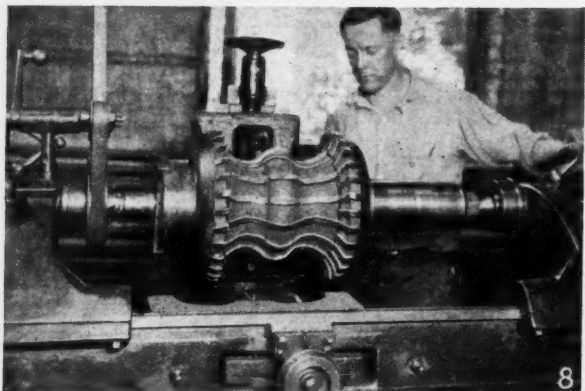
Form-grinding an inserted tooth cutter. The form is produced by a cam which controls the movement of the wheel-head. Fig. 9—Milling keyways in impeller shafts. This 30-year-old machine does a first-class job.
